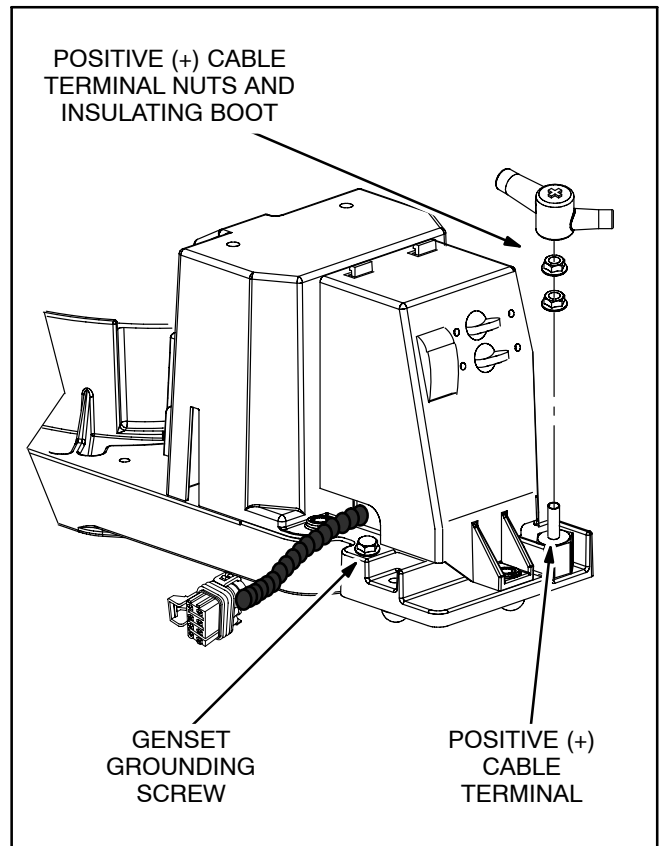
POSITIVE (+) CABLE TERMINAL & GENSET GROUNDING SCREW
